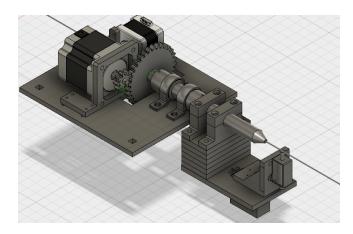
A zoomed out perspective of figure 1 to conceptualize the 3D rotator in our final design.
